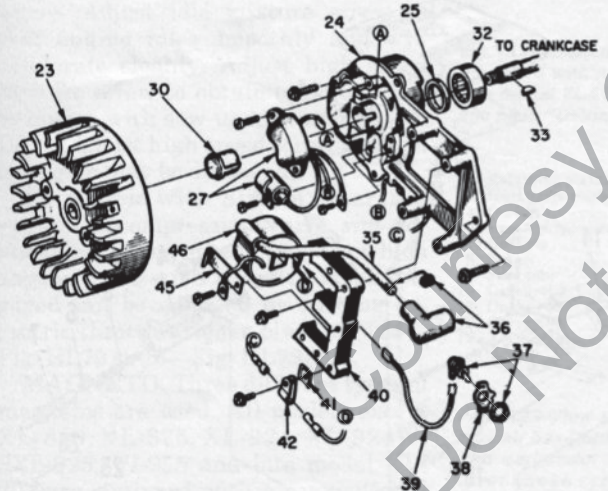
Exploded view of solid state (breakerless) type flywheel magneto. Refer also to Fig. HL83. Refer to Fig. HL81 for conventional type magneto or to Fig. HL84 for capacitor discharge magneto.
